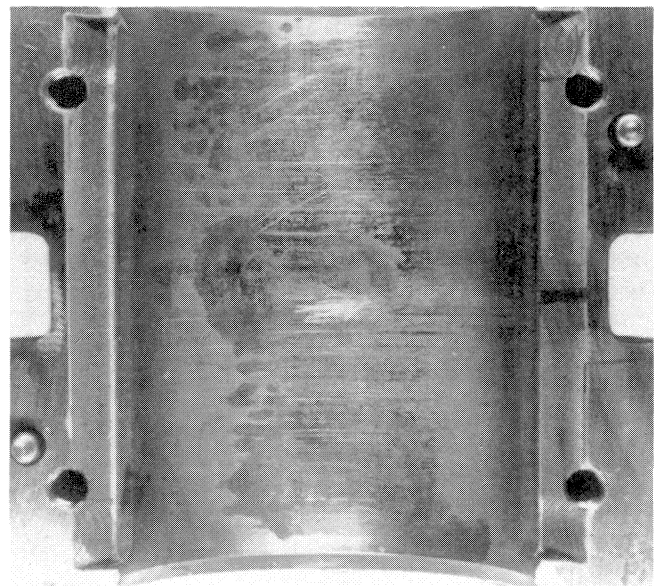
Corrosion of a 5.0 in (12.7 cm) Diameter Lead-base Babbitt Journal Bearing.
